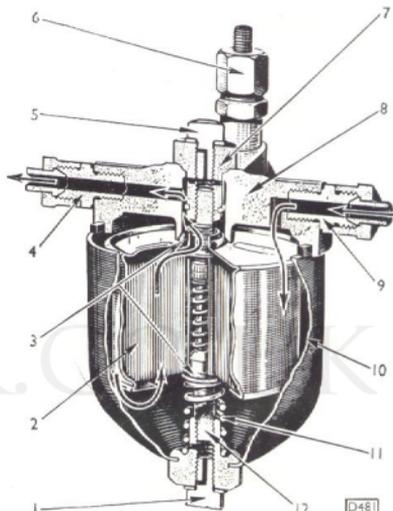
Section of fuel filter (C.A.V.)—paper element type.
